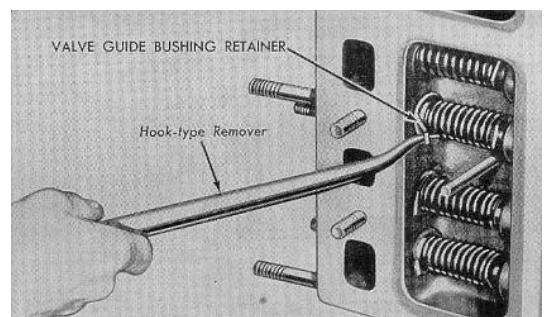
Removing valve guide retainer preparatory to removal of valve, spring and guide as an assembly.
